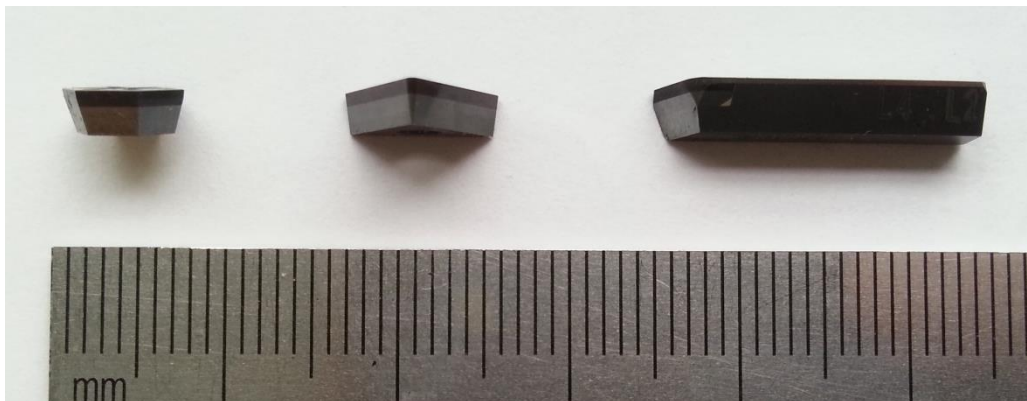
Chipped pcBN insert (parallel edge to edge distance is 6 mm)
